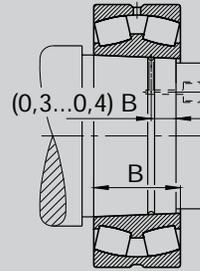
Dismounting of Tapered Shaft by using Hydraulic Pressure
